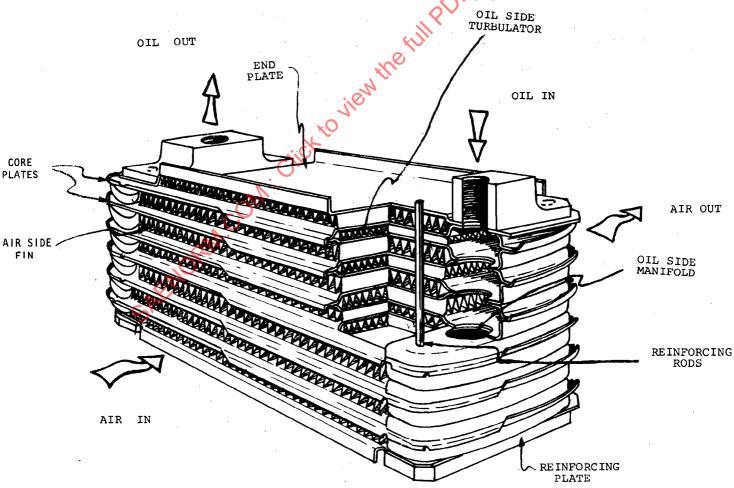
PLATE FIN SEPARATOR OIL TO AIR COOLER
